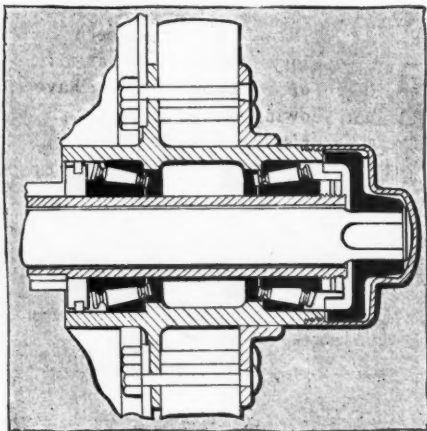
HOW REAR AXLE OF KISSEL CAR IS FASTENED
